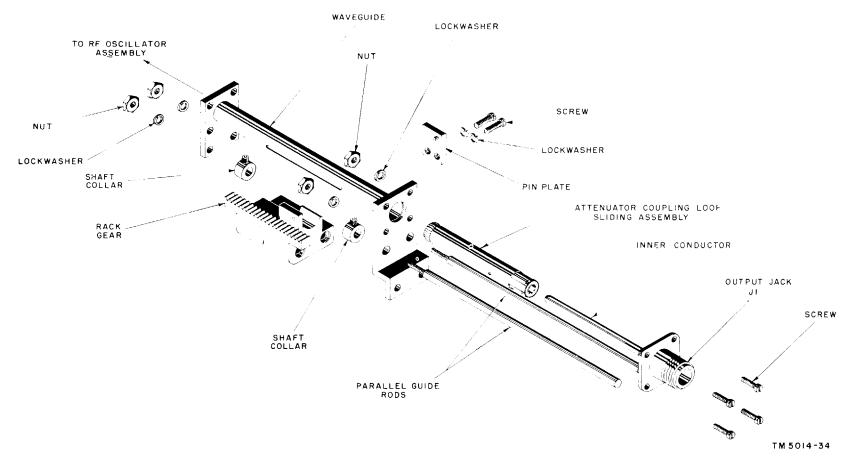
Test Set TS-538(*)/U, attenuator assembly, exploded view.
